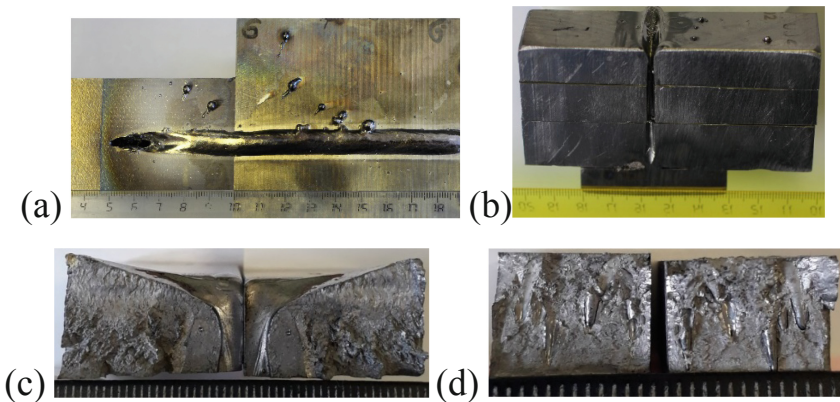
Typical crater view at EBW end for 50-mm thick VT23 alloy template (Table 2) produced with 30E3000 machine: (a) weld surface view; (b) crater section and penetration view; (c) crater fracture view in reinforcement zone; (d) weld root fracture view. *Source:* prepared and compiled by the authors
